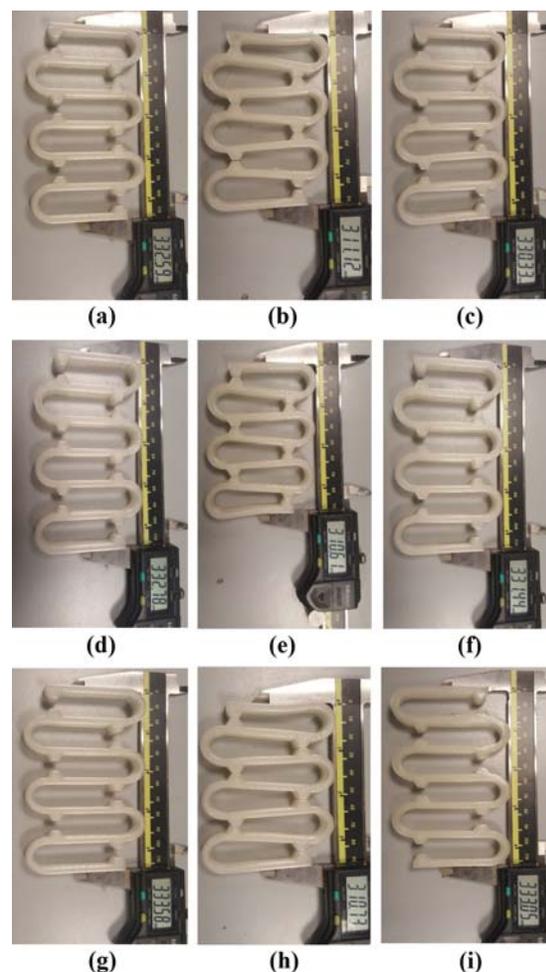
The 4D-printed spring specimen, produced of eSUN 4D filament e4D-1 white shape memory polymer: (a) Specimen 1, initial length of the as-printed spring (25°C); (b) specimen 1 after shrinking (60°C and compression); (c) specimen 1, after reheating and cooling (25°C); (d) specimen 2, initial length (25°C); (e) specimen 2, after shrinking (70°C and compression); (f) specimen 2 after reheating and cooling (25°C); (g) specimen 3, initial length (25°C); (h) specimen 3, after shrinking (80°C and compression); and (i) specimen 3 after reheating and cooling (25°C)
